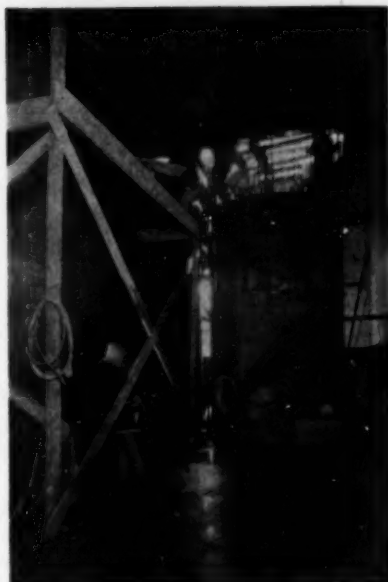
Arc Welder Sealing Joints in Absorber Tower; These Towers Are 100 Ft. High and 10 Ft. in Diameter, Constructed of Plate Varying in Thickness From $\frac{1}{2}$ In. at Bottom to $\frac{1}{4}$ In. at Top; Arc Welding to Seal Riveted Joints Makes Tightness Against Gas and Solvent Leakage Certain
